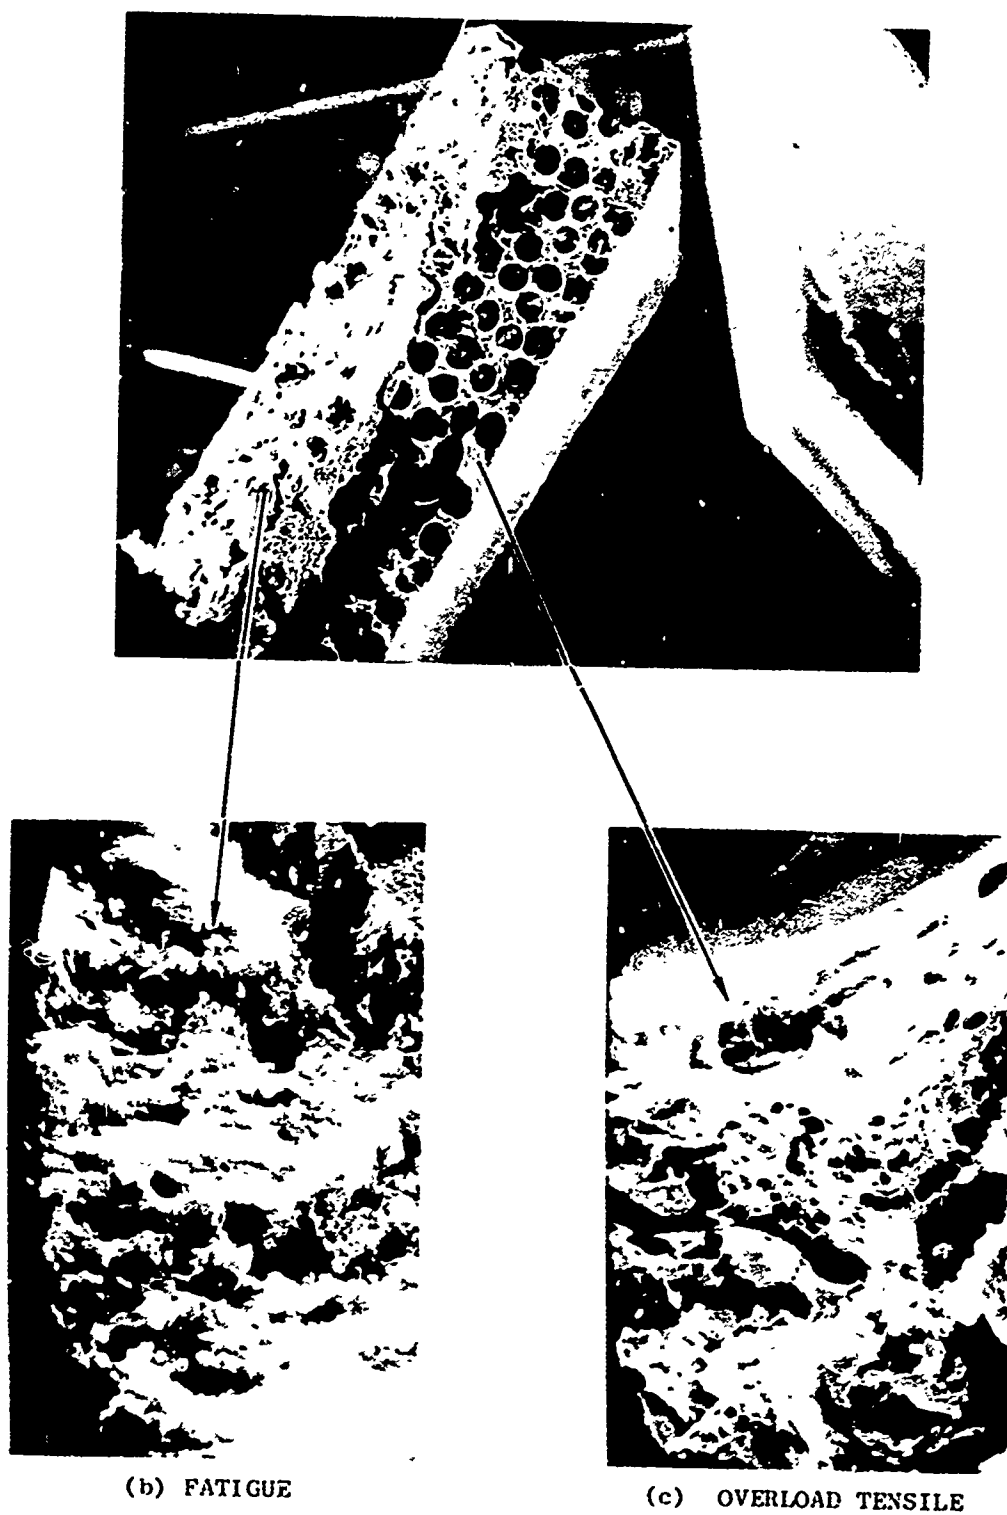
Fractography of an Axial Fatigue Specimen [ (a) 27 X, (b) 1425X, (c) 1350X ]
